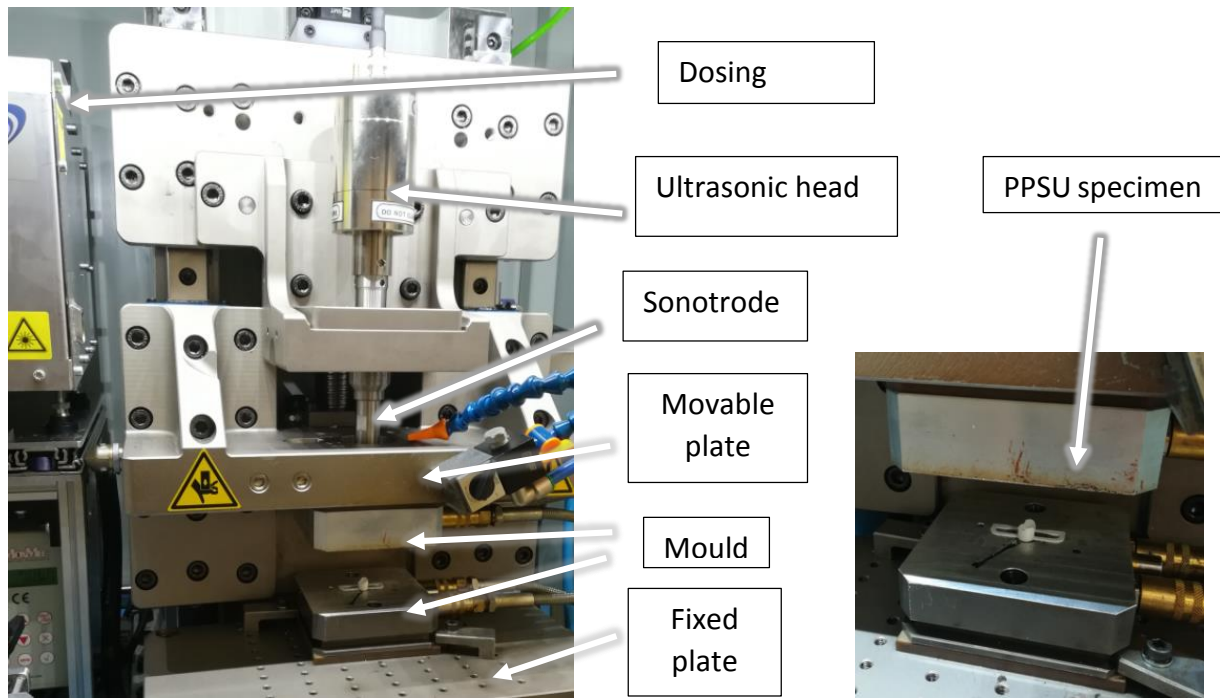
Experimental setup: a) Sonorus® 1G moulding machine, b) mould
